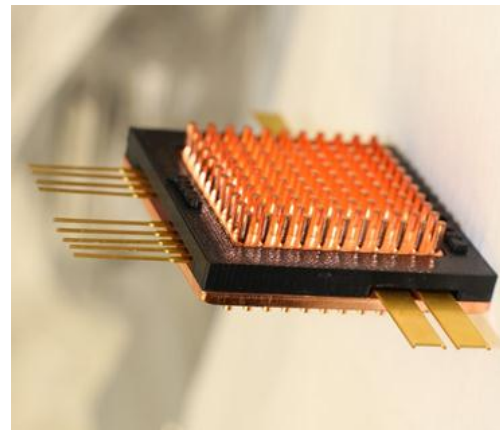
Photo of PBA SiC module packaged with integrated double-sided pin fin cold plates.
